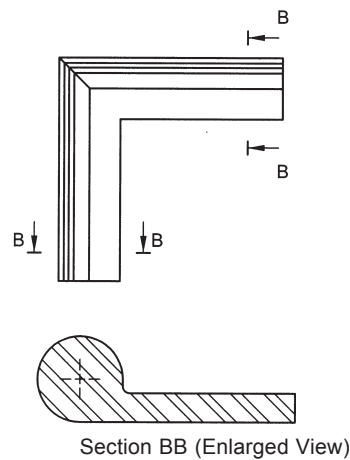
DETAILS OF MOULDED CORNER SEAL
